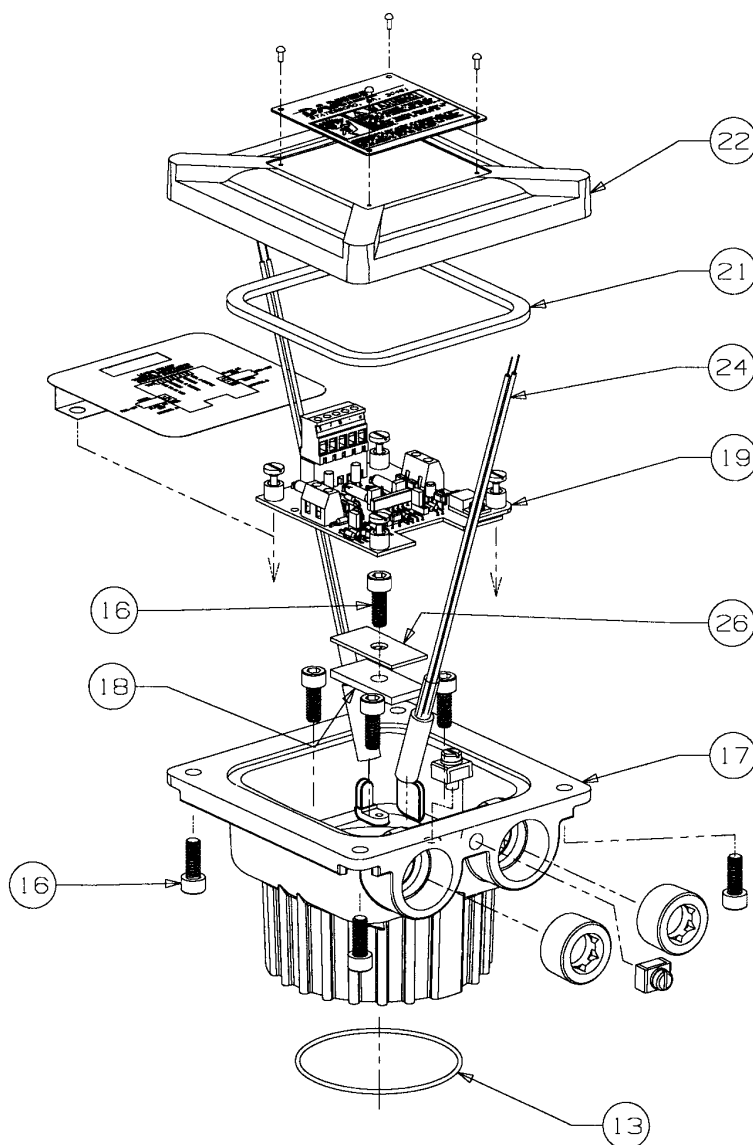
UMB Assembly - All Sizes (Reference Table 7-1)
